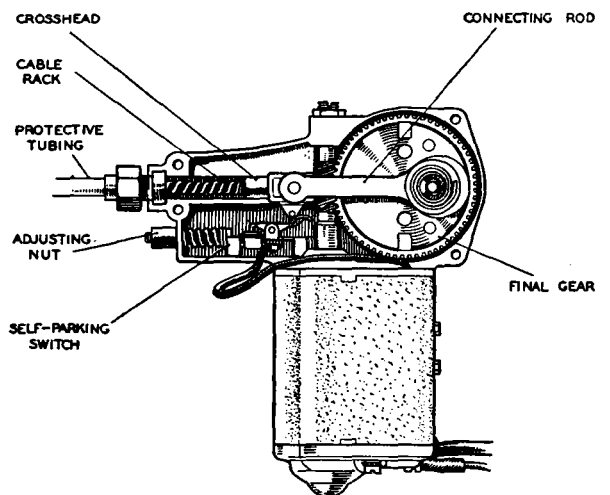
Showing the DR3 wiper motor with cover plate removed.
